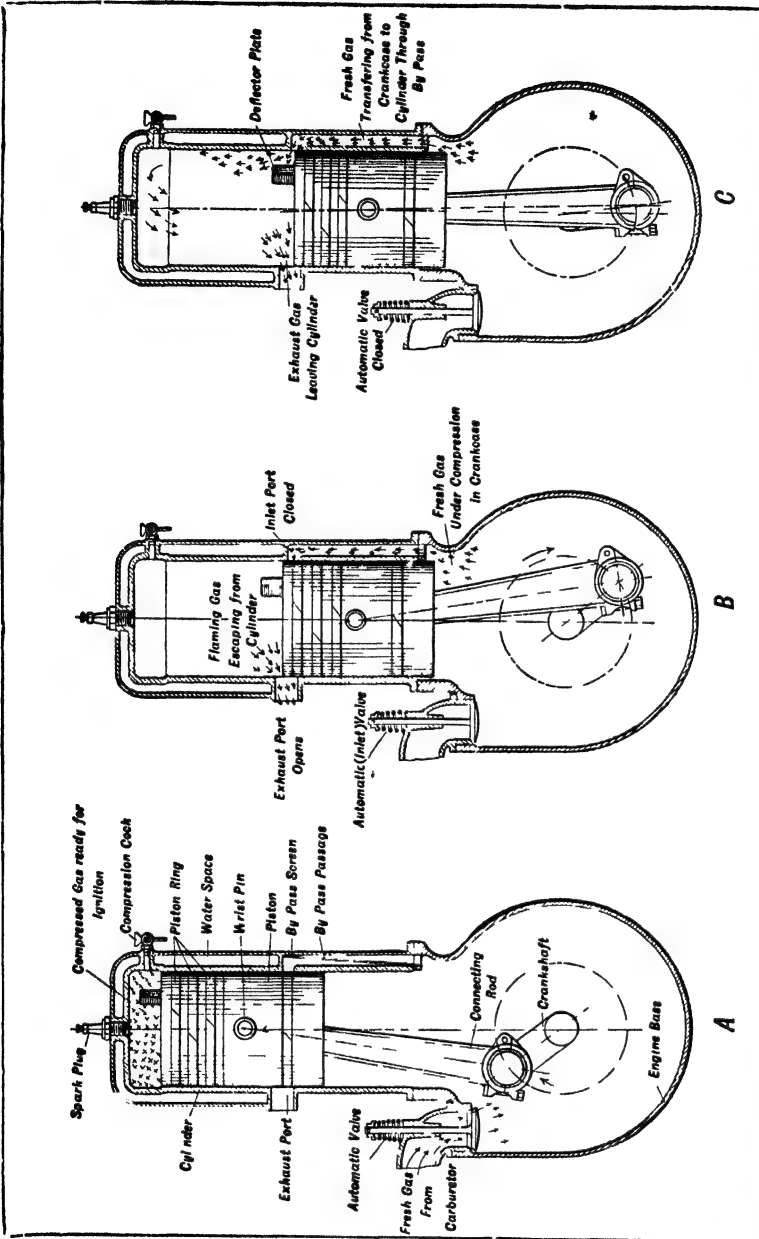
Diagrams Showing Two-Port, Two-Cycle Engine Operation. A—Compressed Gas Ready for Ignition in Cylinder Above the Piston, Fresh Gas Entering Crankcase. B—End of Power Stroke, Exhaust Ports Open and Fresh Gas in Crankcase is Transferred to Cylinder. C—Conclusion of Exhaust Stroke, Fresh Gas Transferred from Crankcase to Cylinder Through Bypass, Forcing Out Part of Burned Gas.
